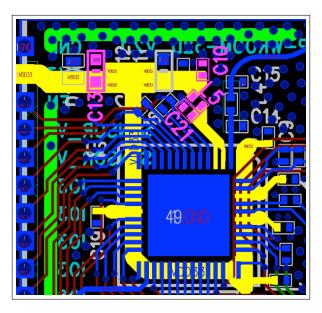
ESP32 Power Traces in a Four-layer PCB Design
